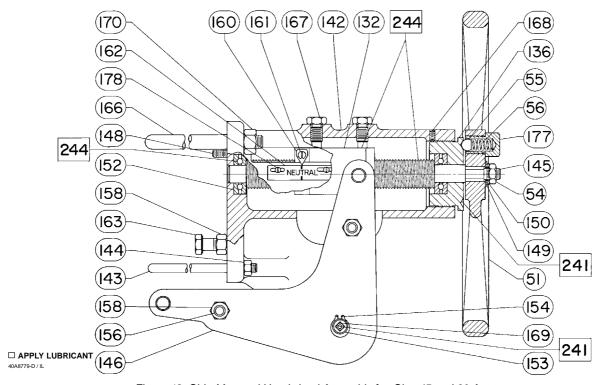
Side-Mounted Handwheel Assembly for Size 45 and 60 Actuators
